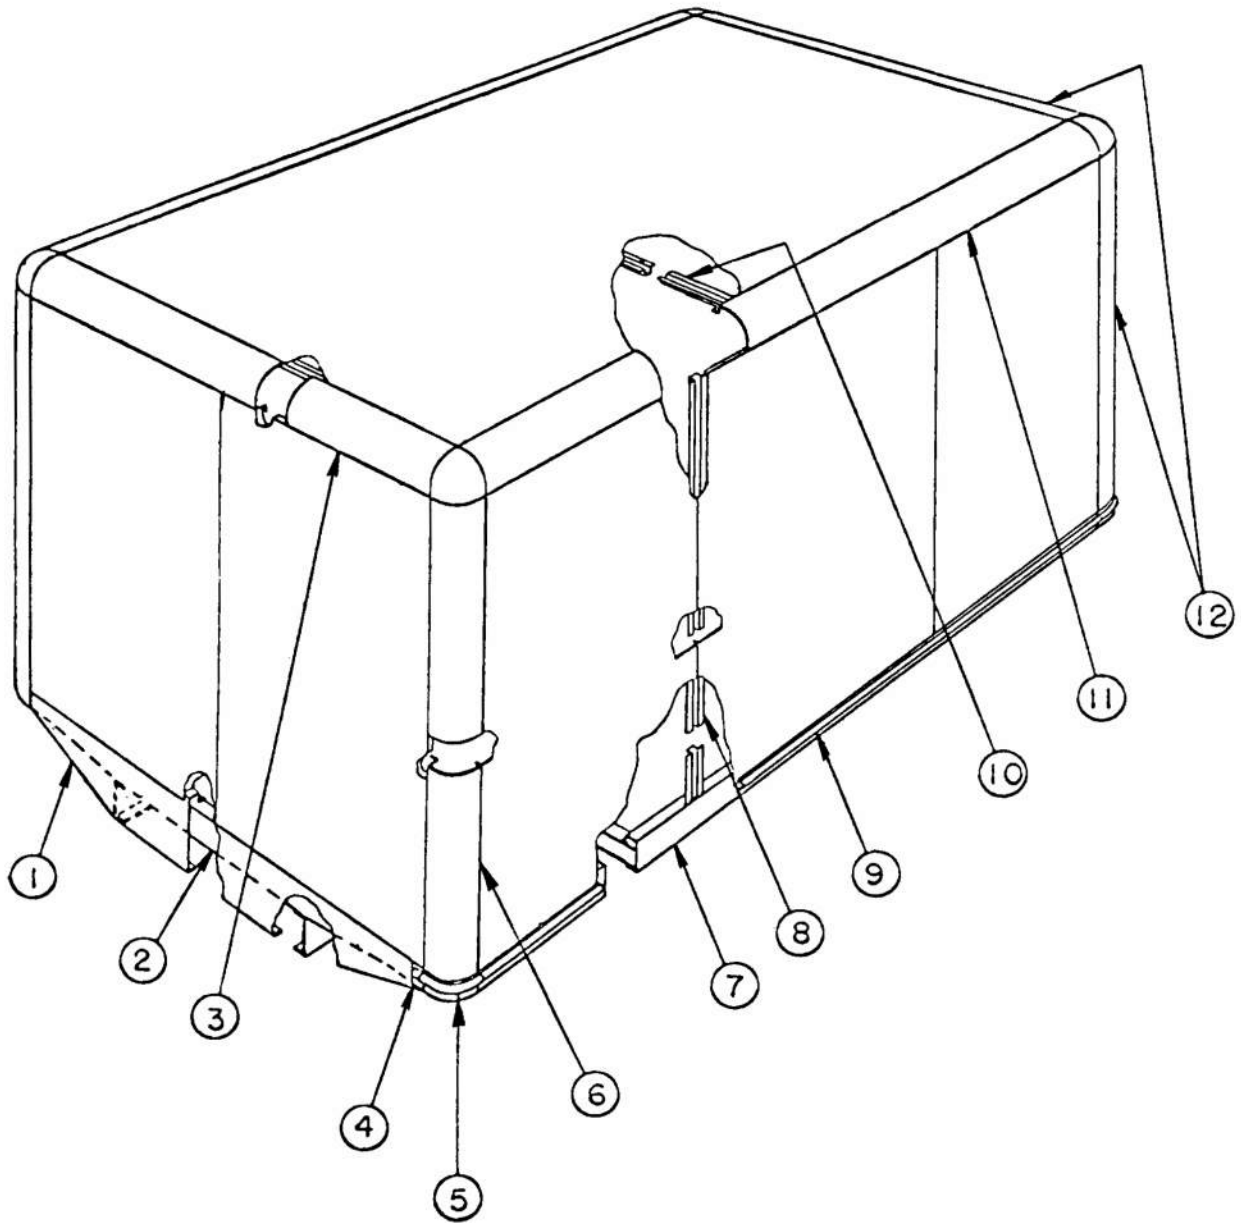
Typical Wall and Roof Construction, Van Body<sup>96</sup>
